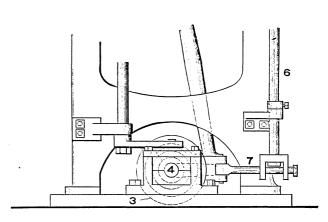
Valve Gear-View at Right Angles to Fig. 6.
